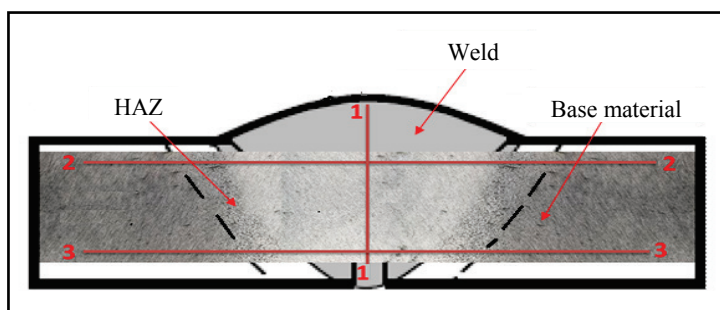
Microhardness measurement paths of welded joints, HAZ – heat affected zone
